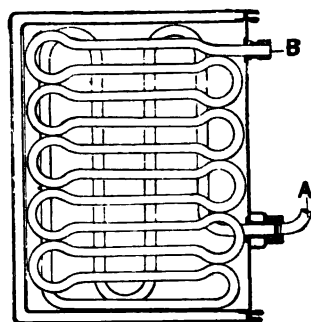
Plan of Serpollet Generator, showing arrangement of coils
